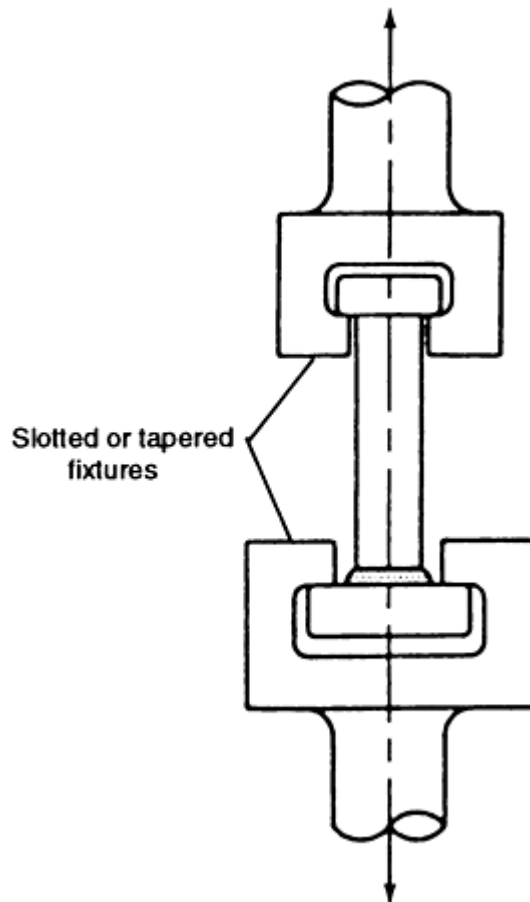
TYPICAL TENSION TEST FIXTURE. FOR QUALIFICATION OF APPLICATION OR PREPRODUCTION TESTING, EITHER BEND OR TORQUE TESTING CAN BE SUBSTITUTED FOR TENSION TESTING.
